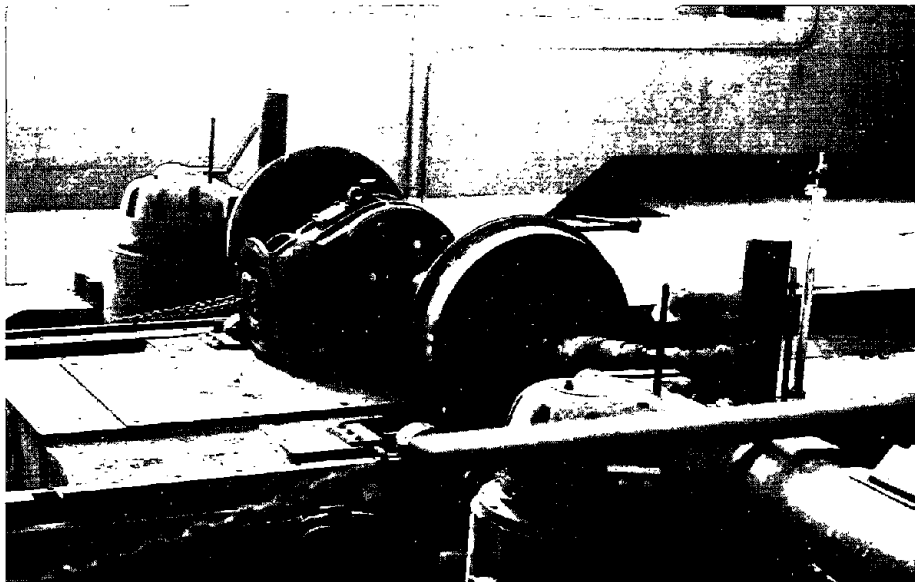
STANRAY UNDERCAR MILLING MACHINE.
